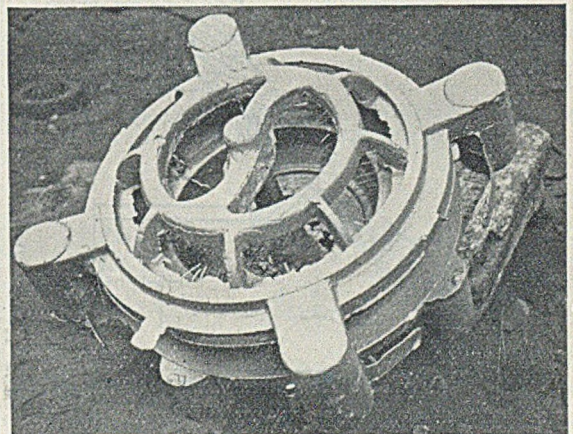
Underside of a Sprocket Casting showing the Ring-type Bottom running Method.
